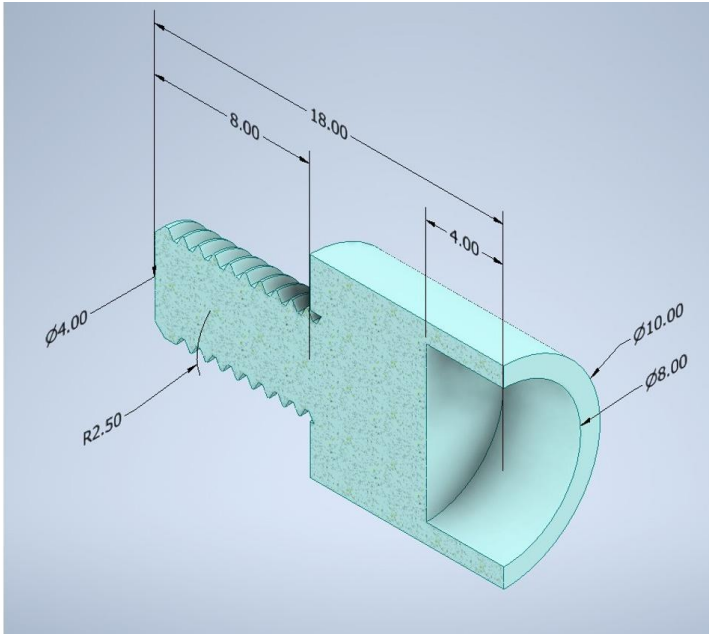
AutoCAD Inventor 3D model of XRCT sample holder manufactured out of PEEK polymer with all dimensions given in millimetres (mm)
